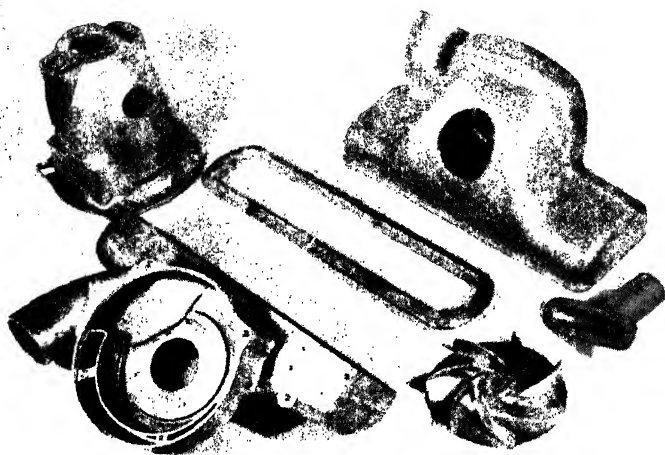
Group of aluminium alloy pressure die-castings as applied to the manufacture of vacuum cleaners
